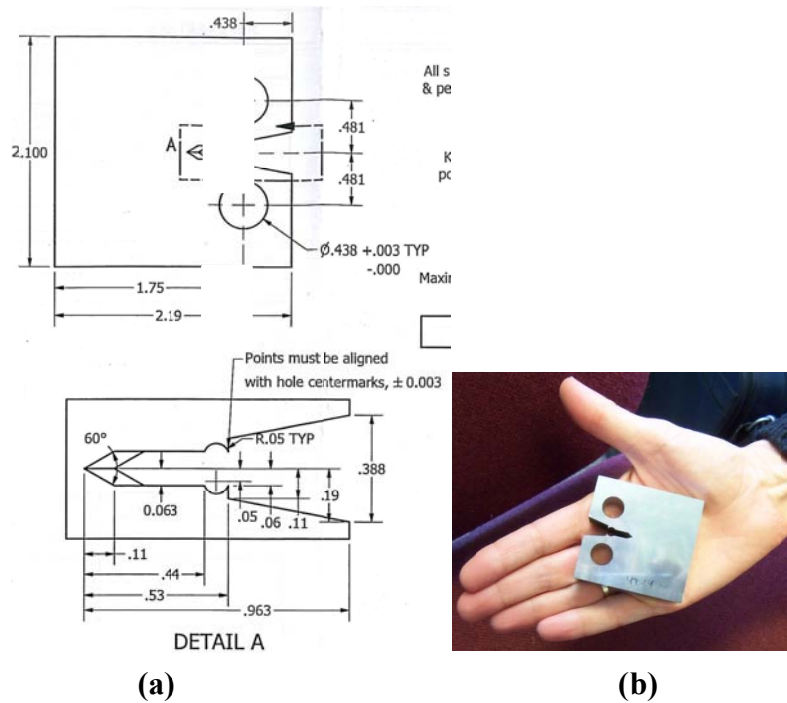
(a) Mechanical drawing for machining the specimen, and (b) an example of a machined specimen
